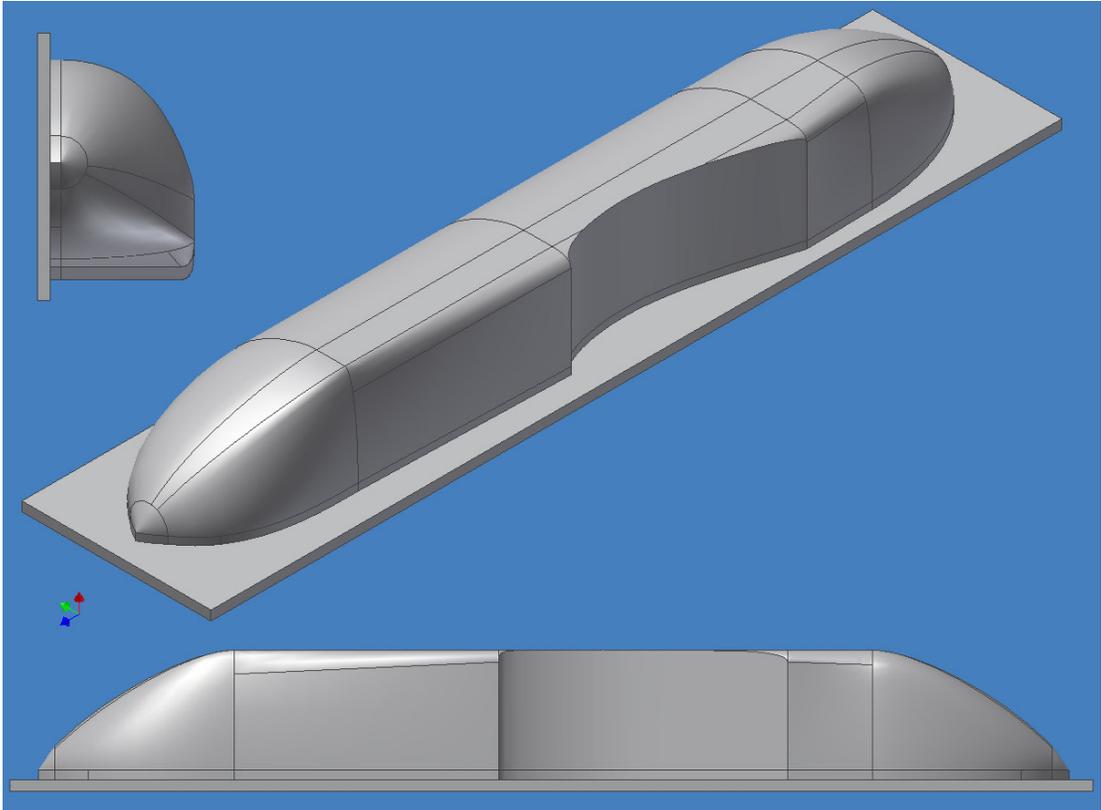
Fuselage Plug – left half: front, isometric & side views.
